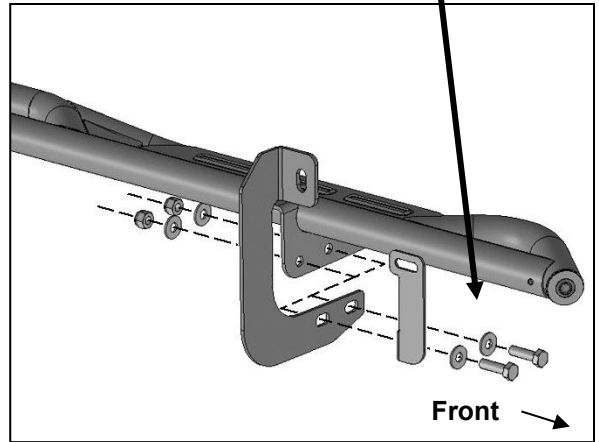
Driver/left #2 Mounting Bracket and Support Bracket
